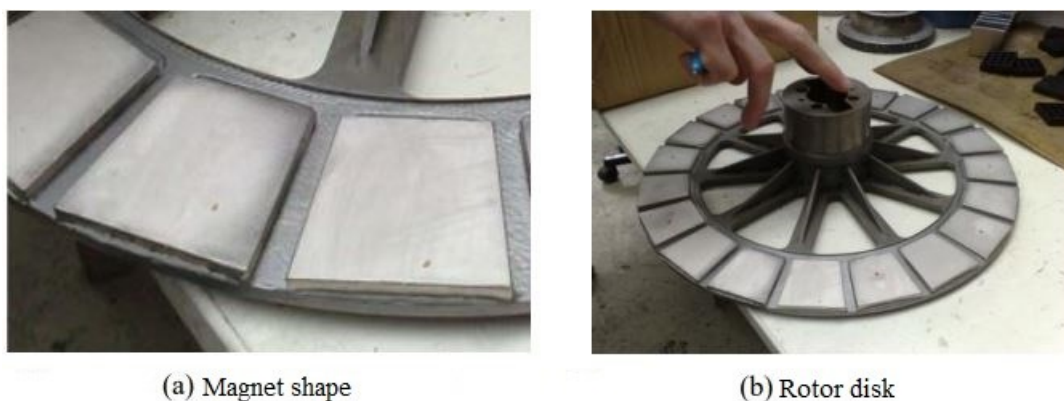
Rotor assembly process of the surface mounted PM machine
